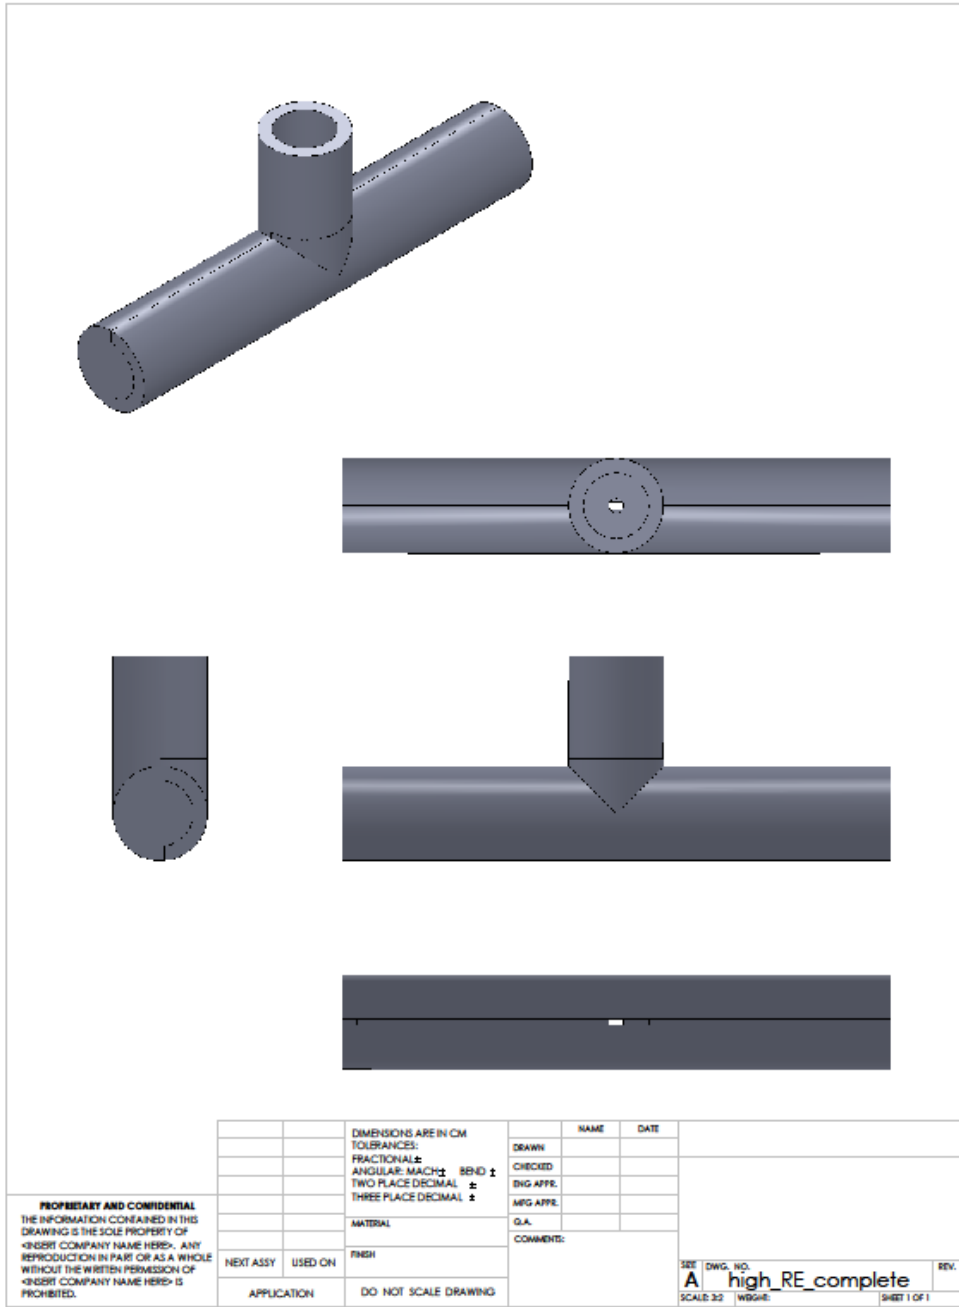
Front, top, bottom, side and isometric view of the fully assembled order-100-*Re* line source.
